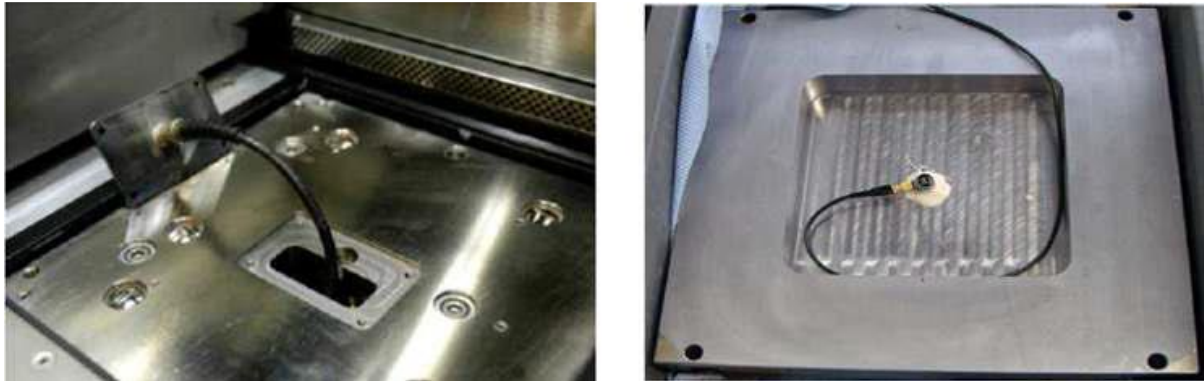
Ultrasonic probe installation in an EOS M270 machine build platform (Rieder *et al.*, 2014)
